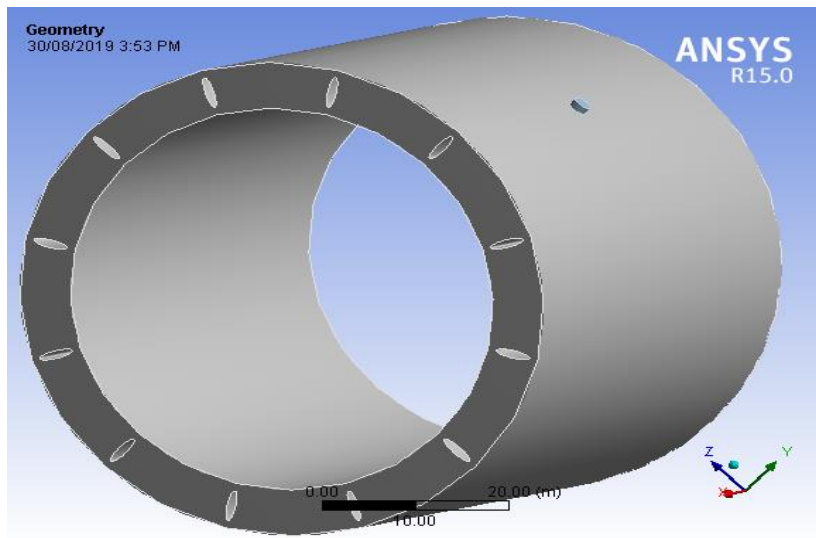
3D model of CFB boiler tube with elliptical shaped perforations
